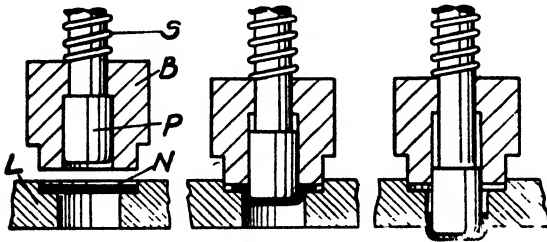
Single Action Cupping Die with Blank Holder.
